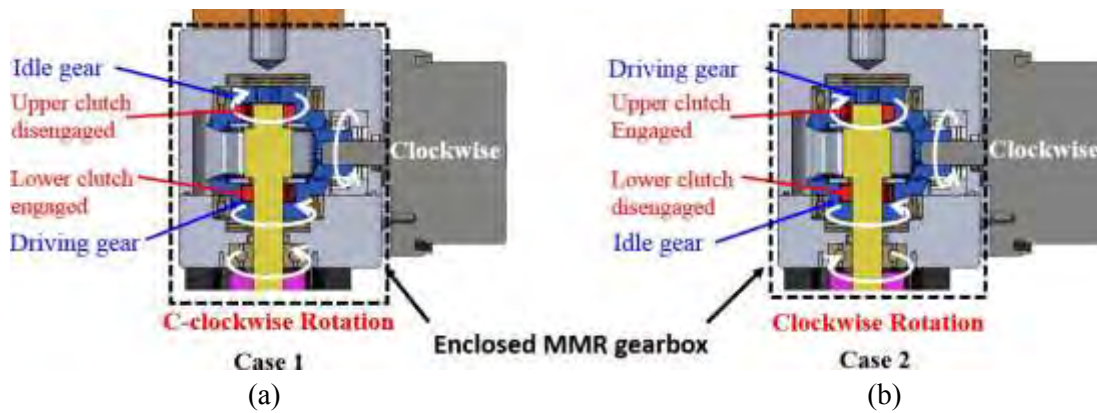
The reciprocating suspension vibration will drive the electrical generator to rotate in one direction using the proposed ball-screw-based mechanical motion rectifier (MMR).
